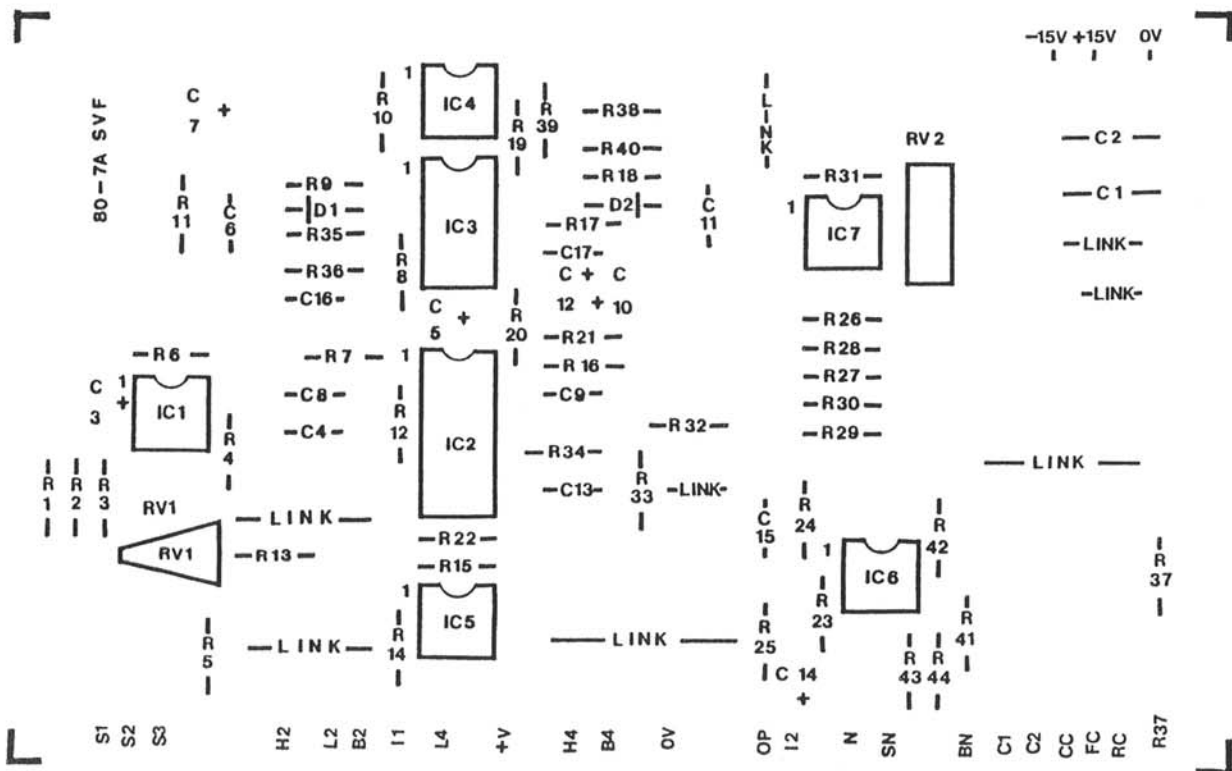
COMPONENT OVERLAY FOR 80-7A
